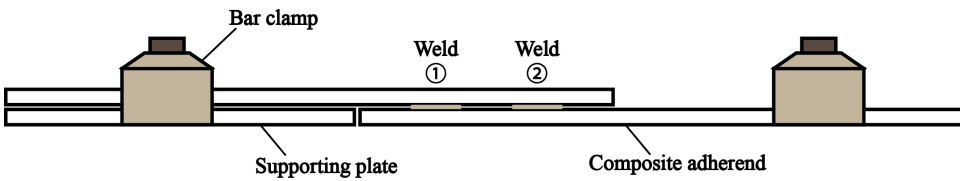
Schematic of the welding sequence used in the sequential double-spot welding in the first part of experimental work, denoted as Sequence I. Weld 1 and 2 represent the spot welded in the first and second place, respectively.
